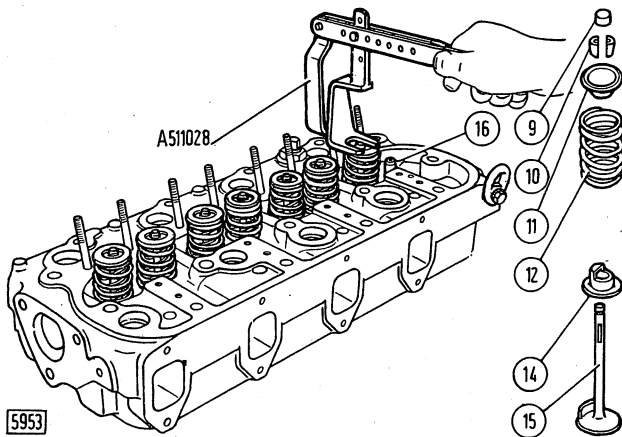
Removing (installing) valves and springs with tool A 511028.
